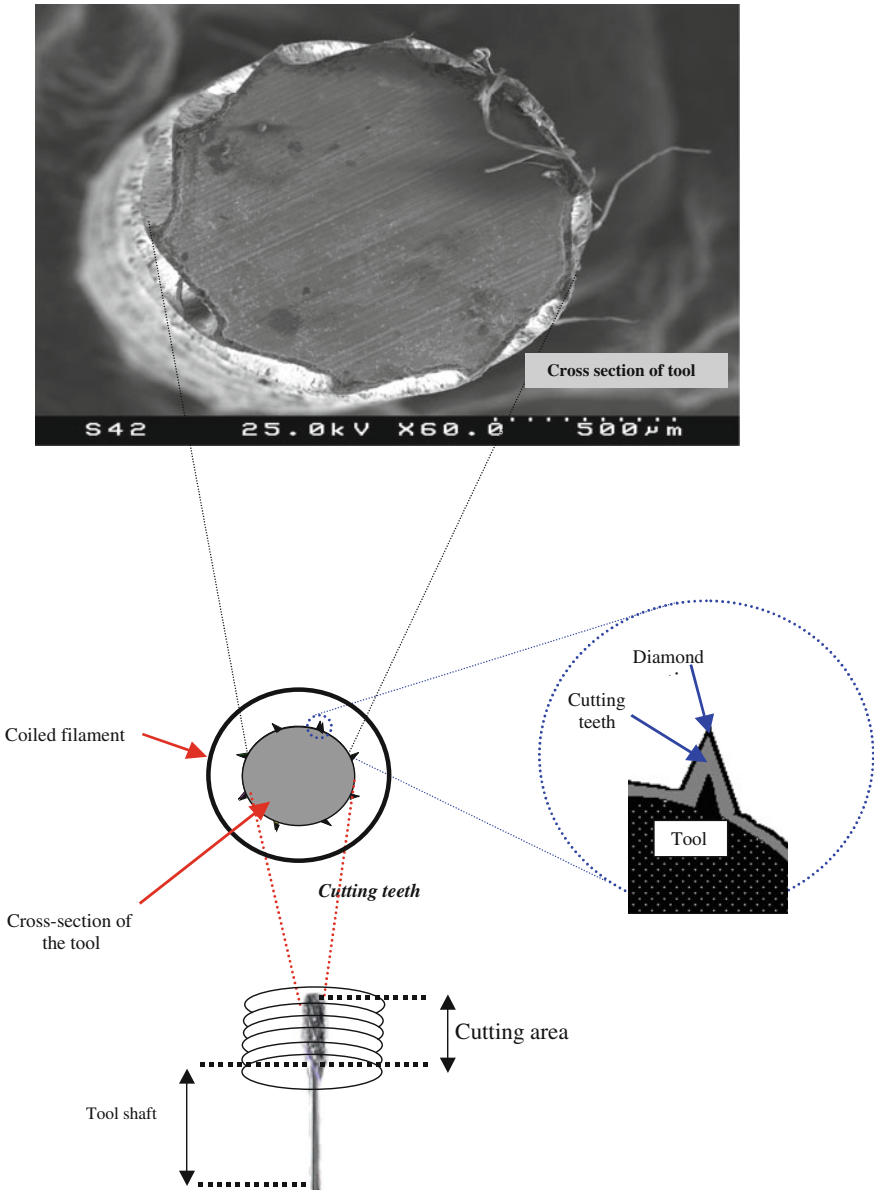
Schematic diagram of surgical tool cutting edges
